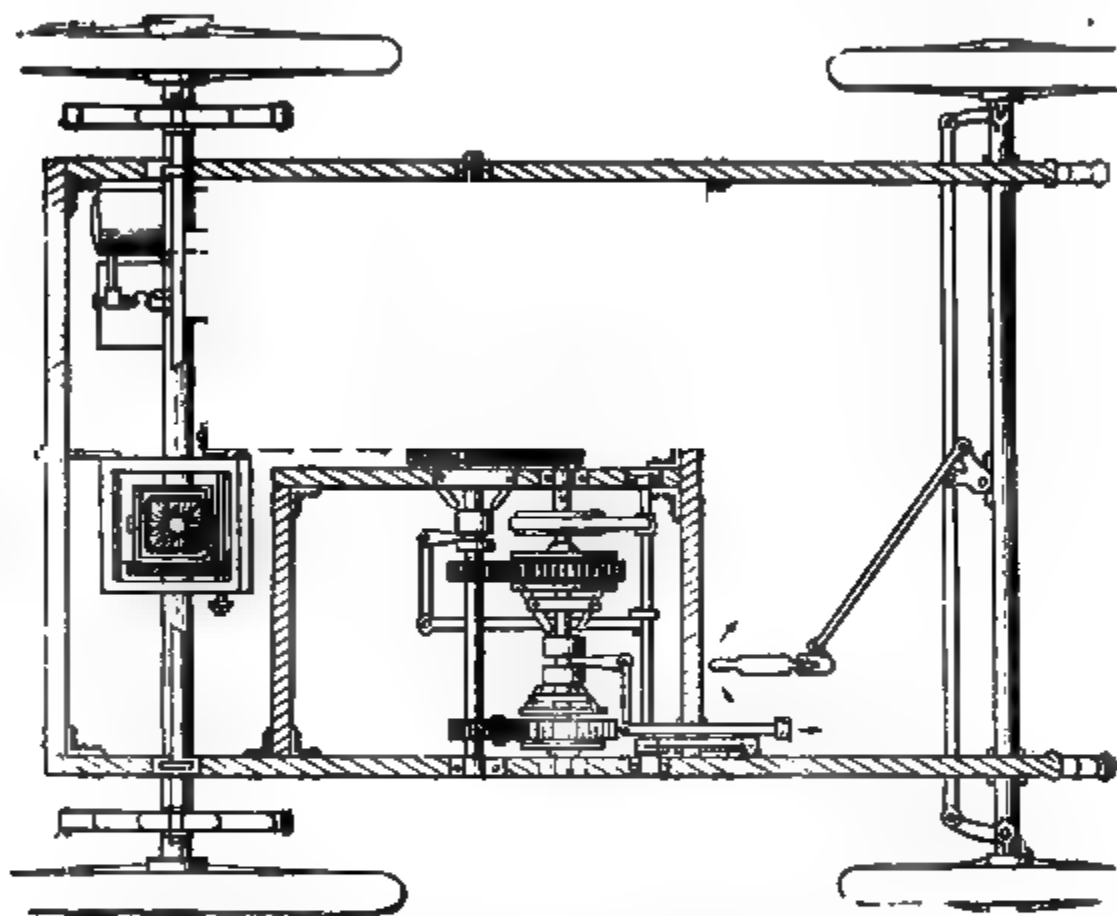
Plan of Running Gear and Mechanism of One Model of the Winton Carriage, showing the single cylinder motor, driving connections, change speed gear and steering system. The change speed gear, already explained, is operated as shown by the two levers figured at the base of the cut; the lower one operating the clutch on the main shaft for giving the first speed, also for throwing on the brake, the upper one operating the two clutches on the counter shaft, for giving the second speed and reverse. The steering lever as shown is connected by a link to a bell crank, which moves a drag link connected to the steering arms of the two forward stud axles.
